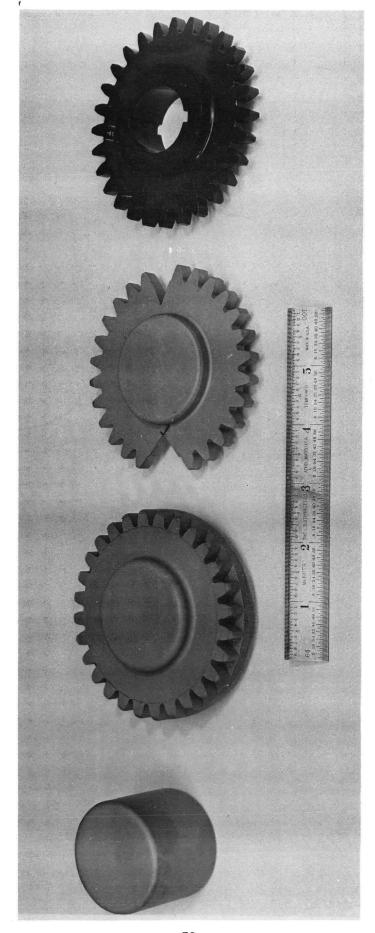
The Four Major Operations in the Production of Ausformed Gears. From Left to Right: Preform, As-Forged, Rough Machined and Finish Machined. (Note: Sections for Metallurgical Examination were Taken From The Partially Finished Gear
